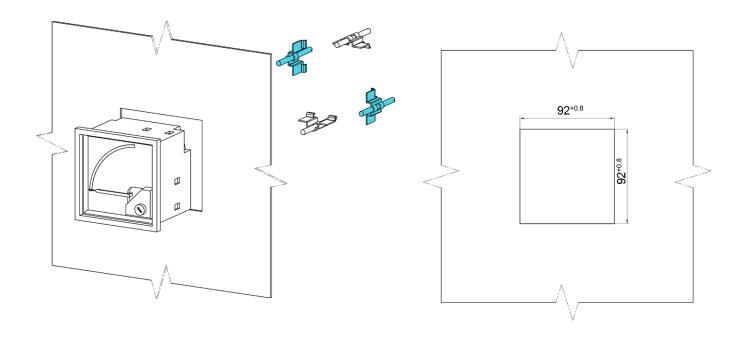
Panel mounting way of EA19D (version IP52)\
